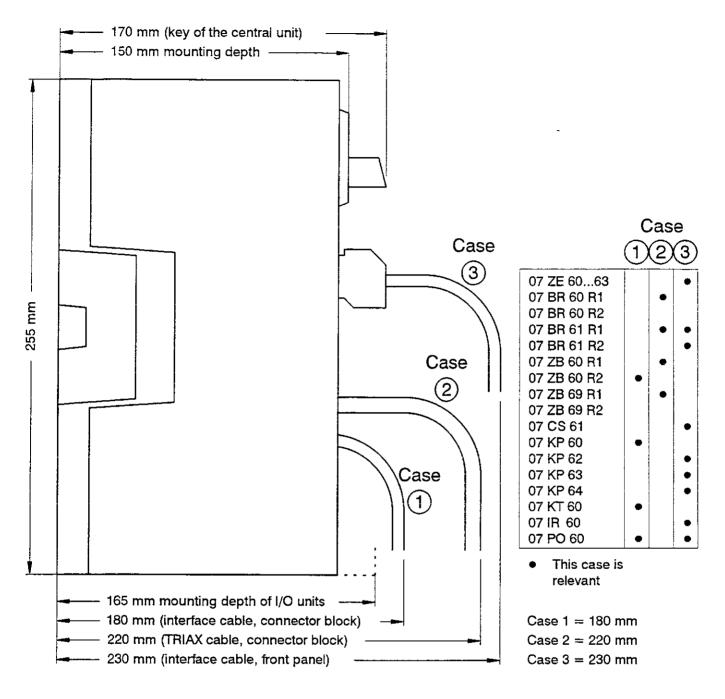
Mounting dimensions of ABB Procontic T200
